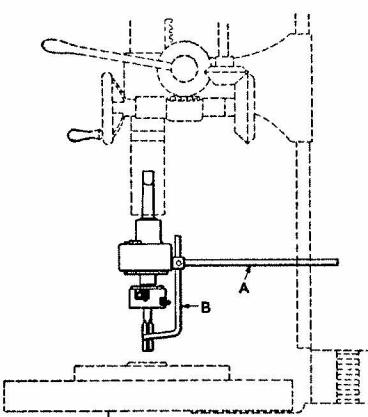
Automatic tapping attachment applied to upright drilling machine.
